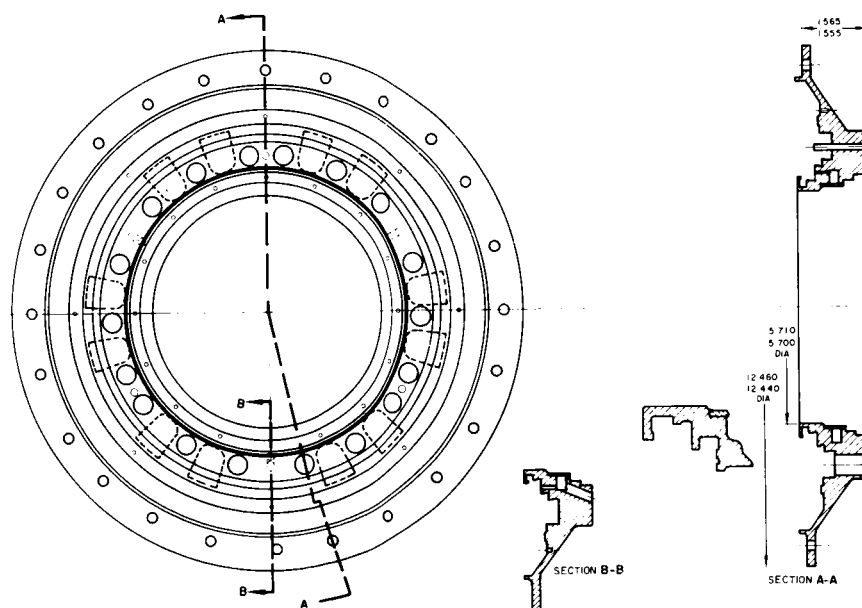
Seal Carrier for Externally Pressurized Hydrostatic Seal (Stein Seal Co. No. SSCY 2993-1)
